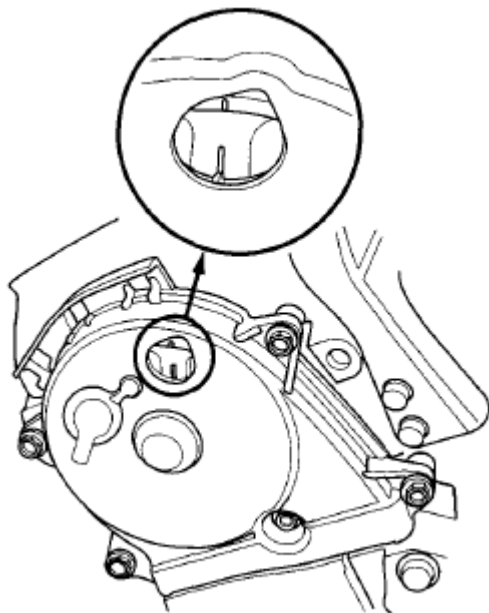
Identifying Camshaft Pulley Marks - Rear
